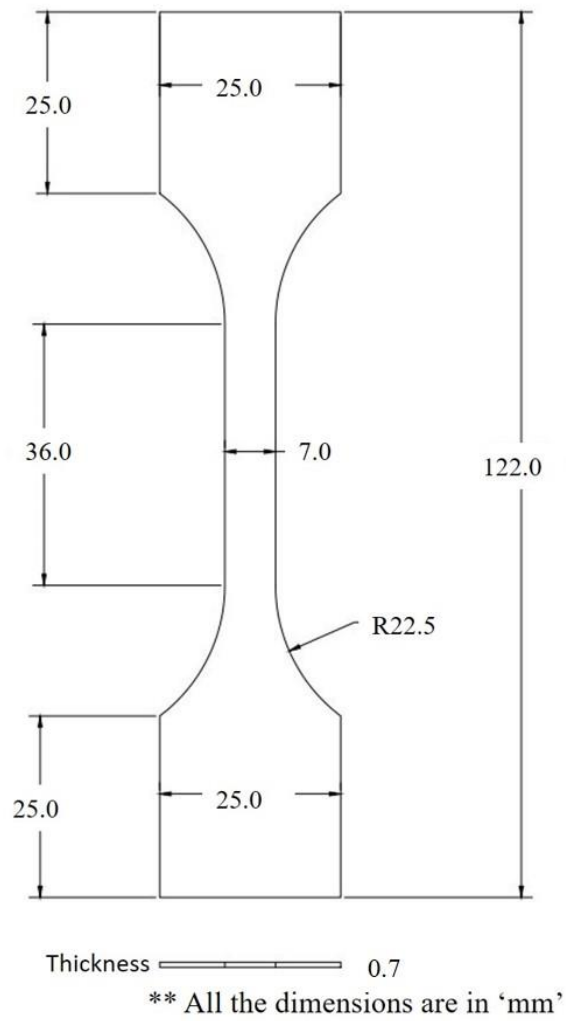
Schematic of the sample dimensions used for the creep testing.
